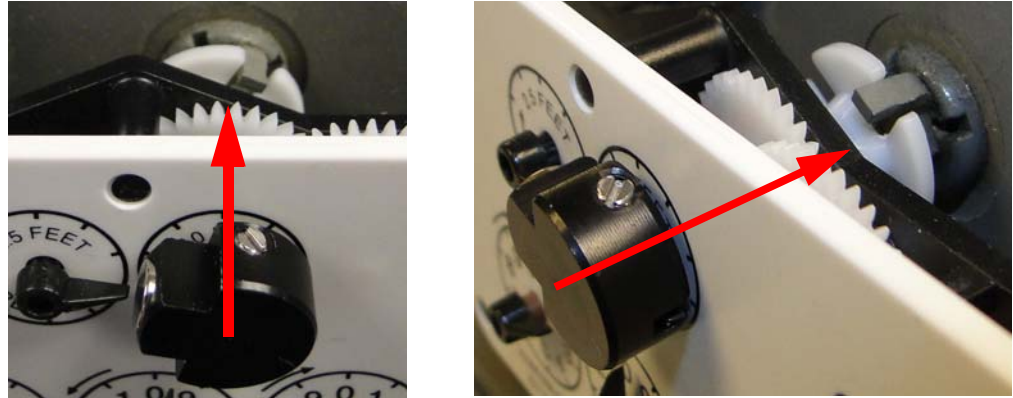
17. Wheel Center Of Rotation Must Align With Meter Drive Center Of Rotation
